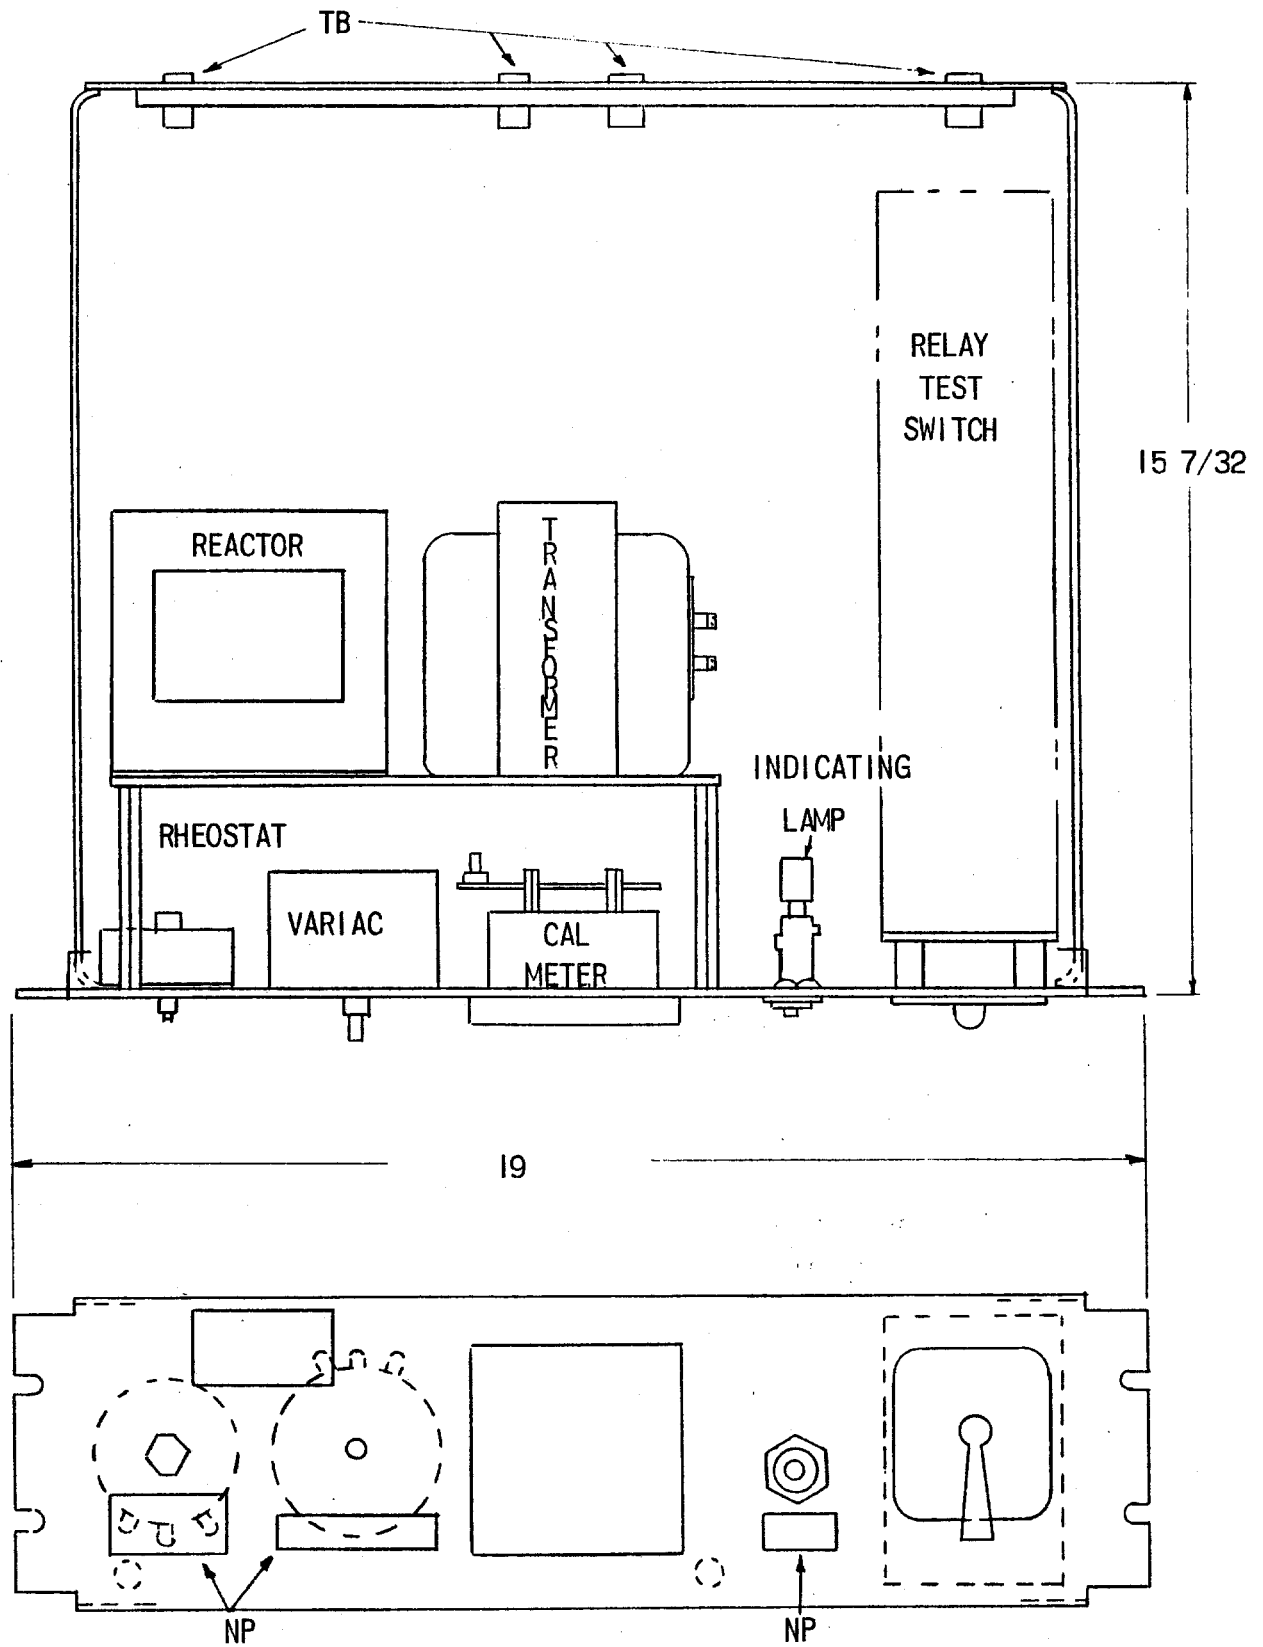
(0183B2490-0) Typical AC Test Panel Assembly for XTC11A Relay
